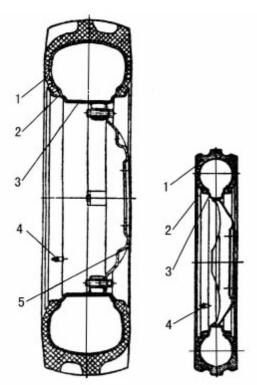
driving tire directive wheel 1 outer cover 2 inner tube 3 rim assembly 4 air nozzle 5radial plate
